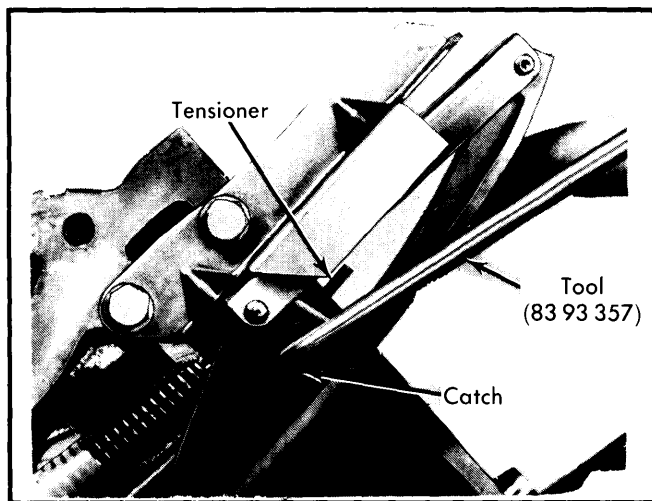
Chain Tensioner and Tensioner Tool (Tension Release Position)
